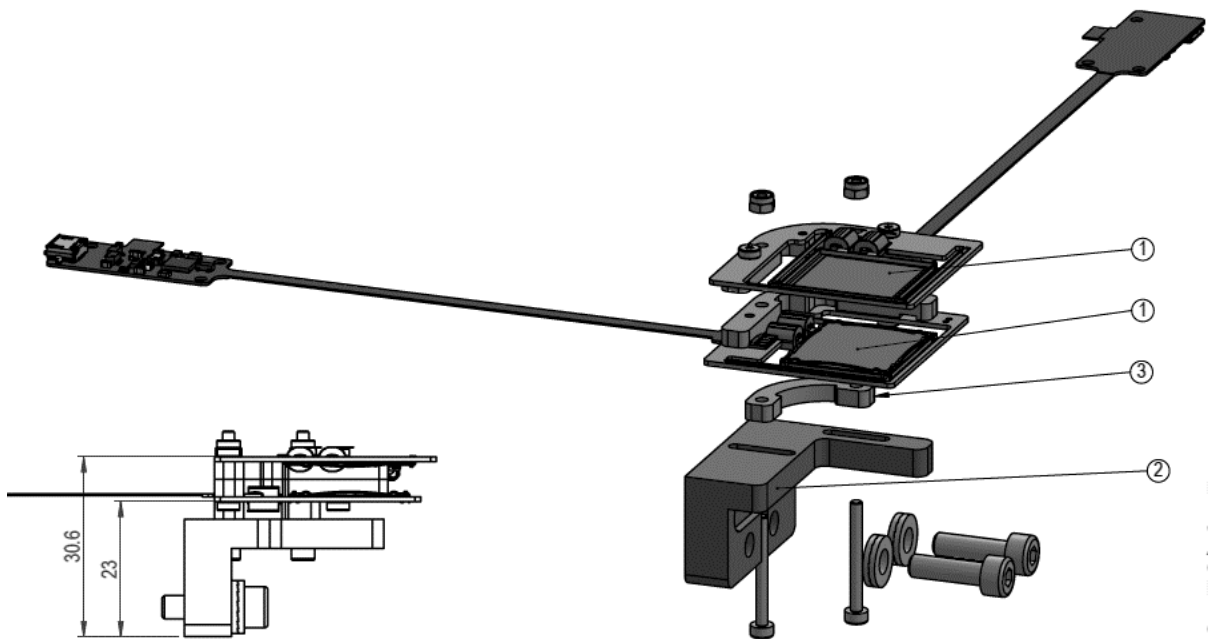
Mechanical layout of the LSR-4C-LL (double diffusor with bracket) assembly:
